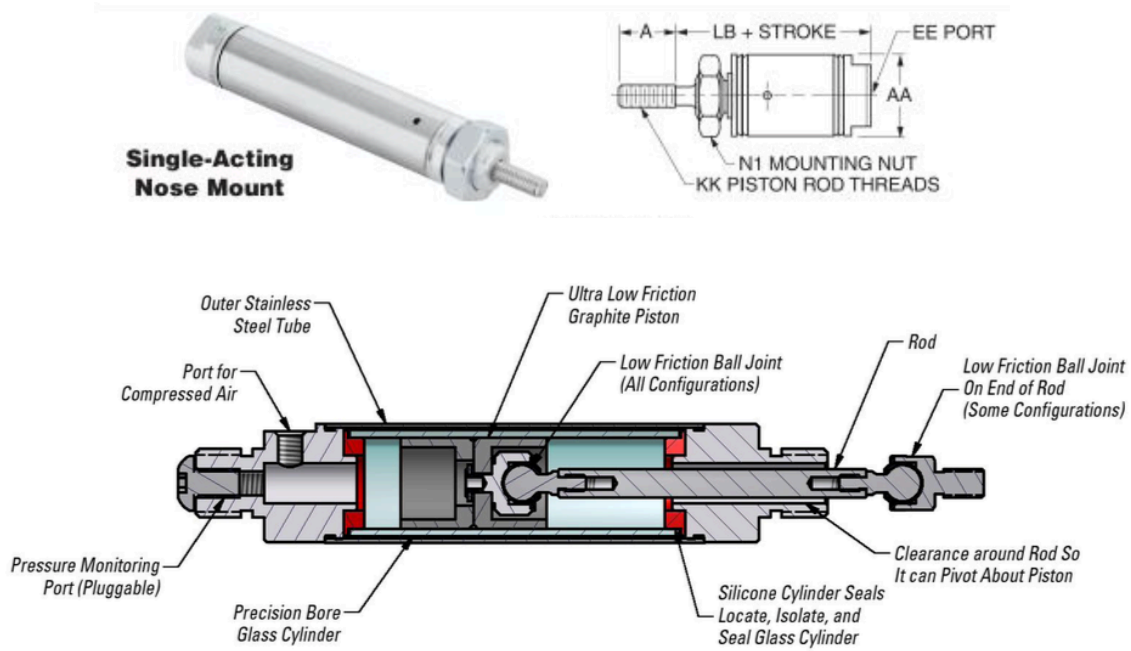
Example of a pneumatic piston that can be purchased off-the-shelf.
